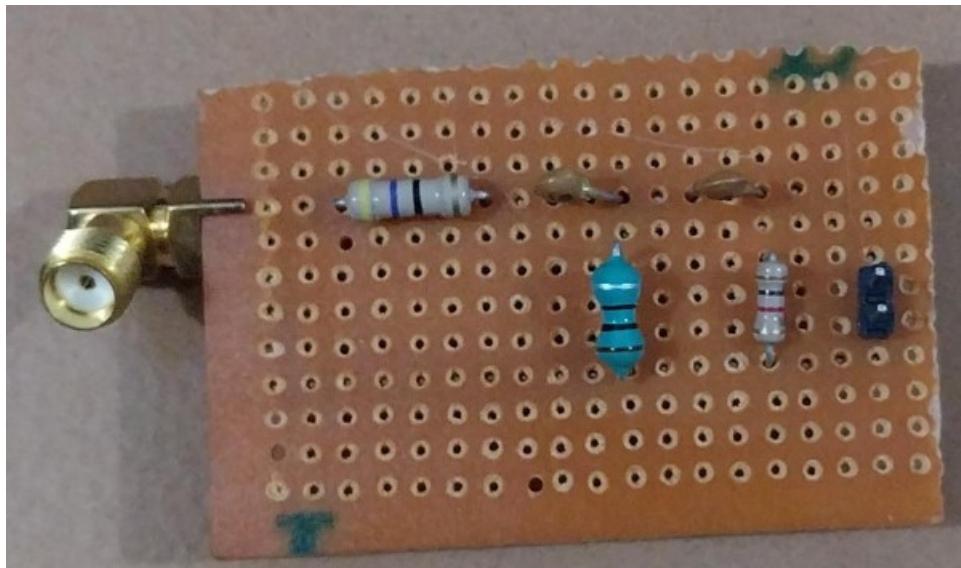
PCB Fabrication of Impedance Matching Circuit
